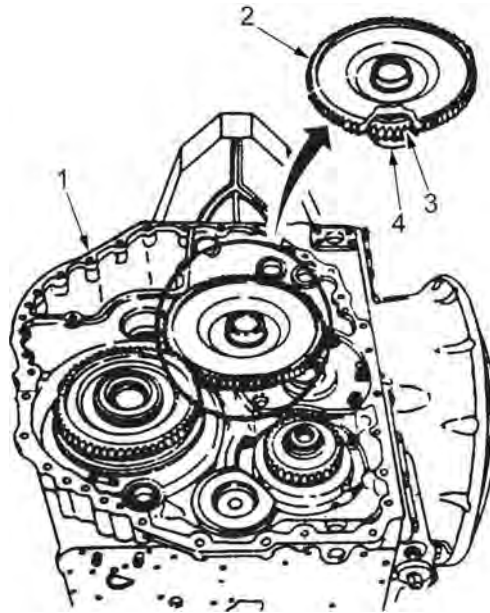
Range Input Gear, Hydrostatic Drive Gear.
